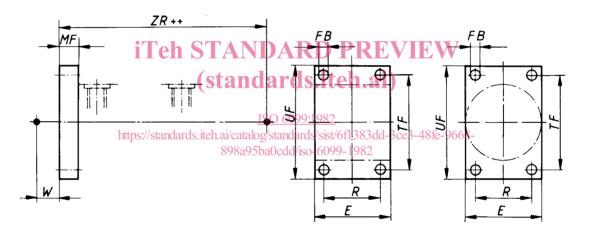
(MDF 1) Head, rectangular flange - Double rod
